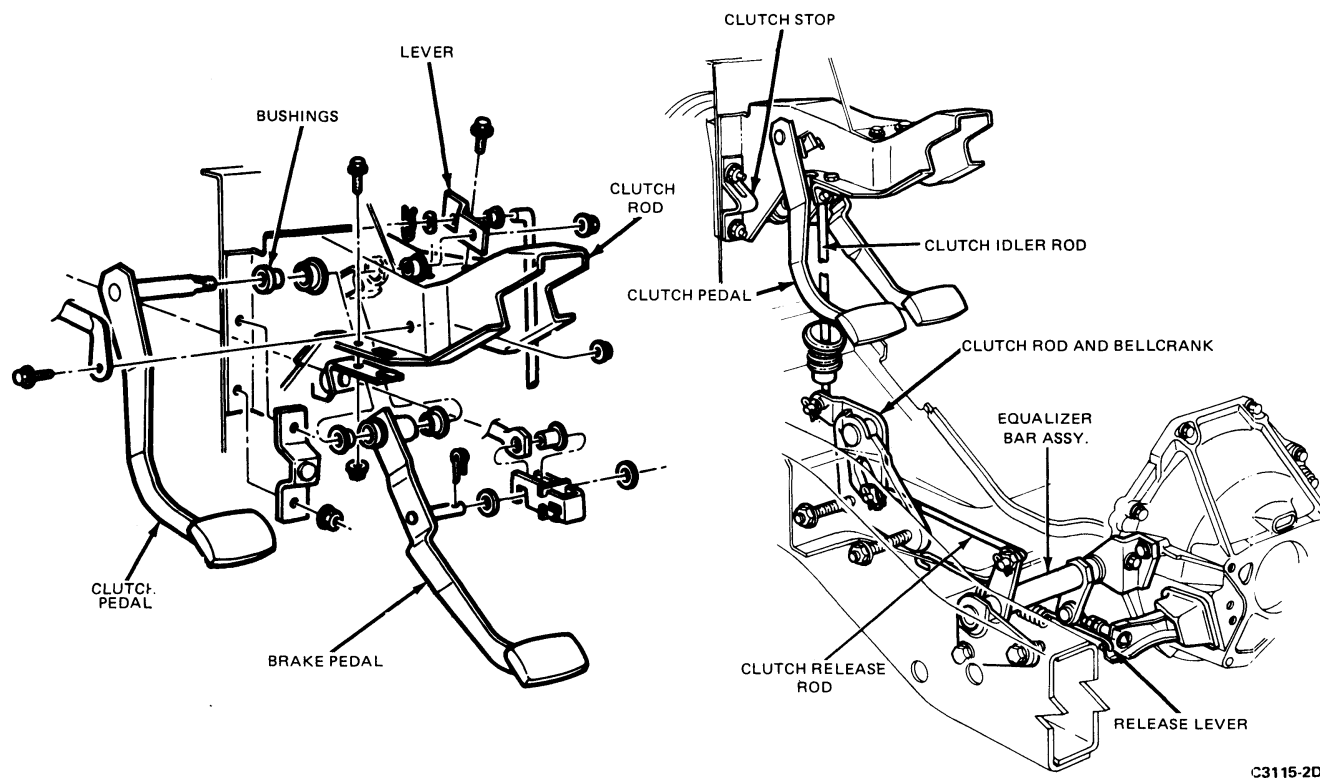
Clutch Mounting and Linkage—E-100—E-350
